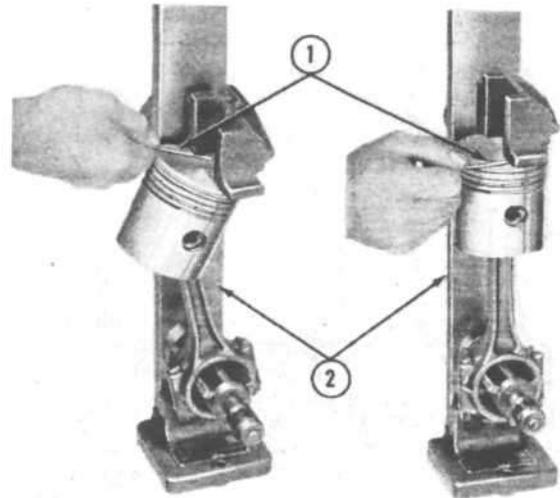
CHECKING PISTON AND CONNECTING ROD ALIGNMENT
